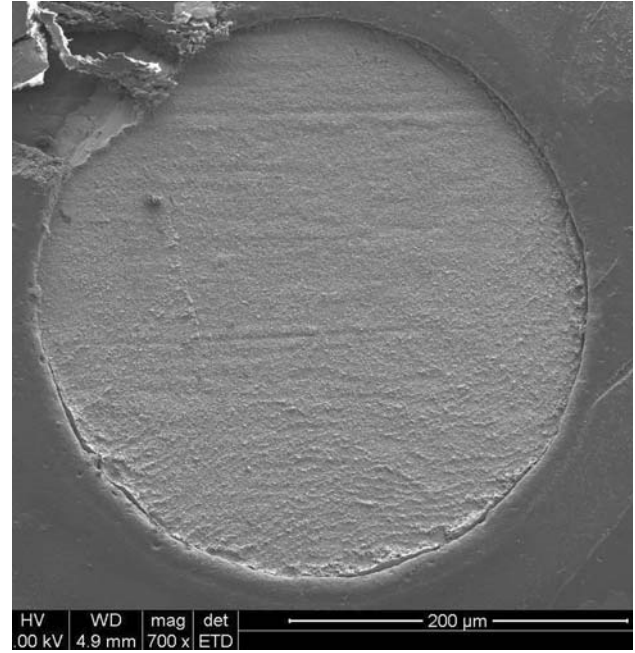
Typical brittle fracture surface of Sn-1%Ag-0.5%Cu after the high-speed ball pull test at 400 mm/s.
